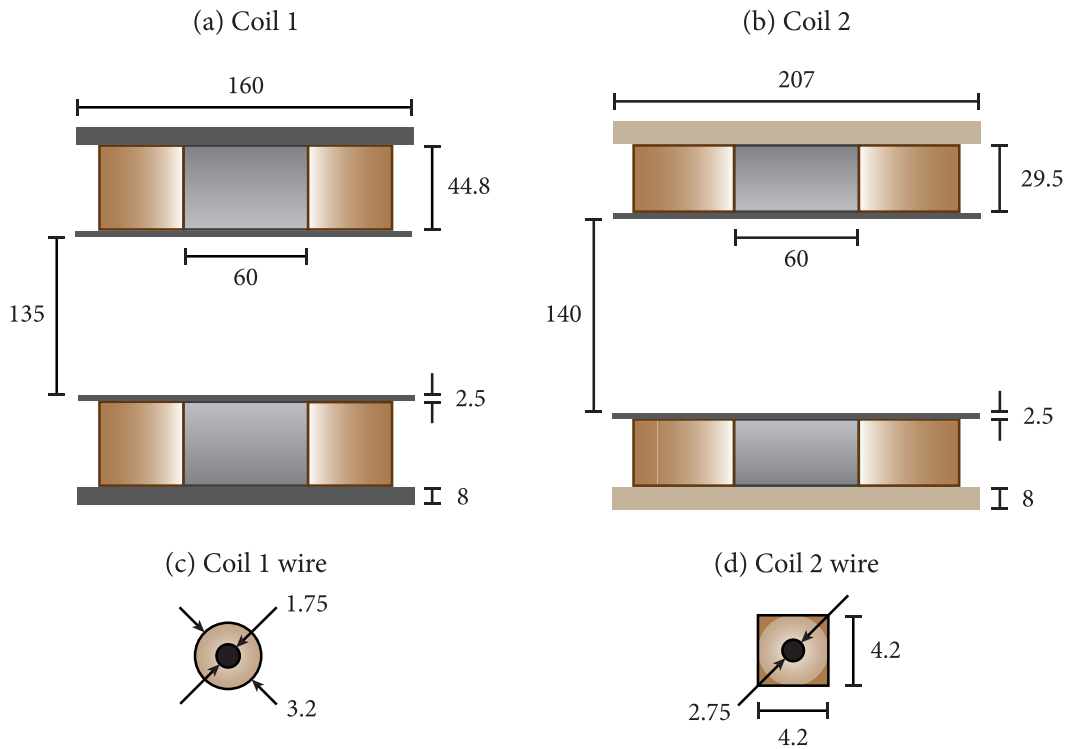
Dimensions of the two different coils used for experiments. Here (a) shows coil 1, (b) shows coil 2, (c) shows the wire used to construct coil 1 and (d) shows the wire used in coil 2. All dimensions are given in millimetres.
